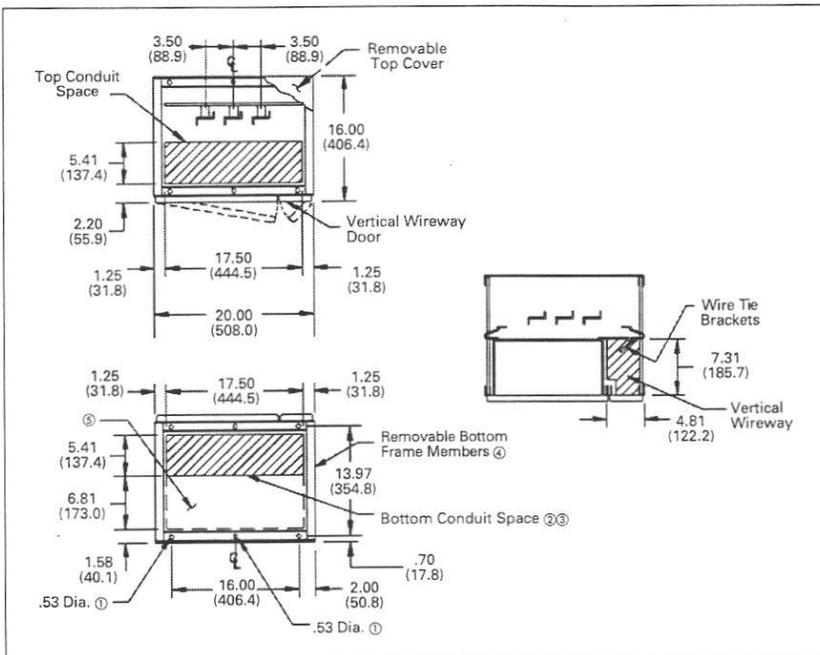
Side View B — Front and Rear Mounted in Inches (mm)
